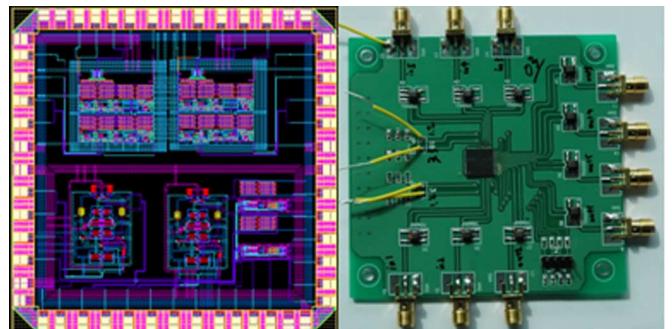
Physical layout and printed circuit board of the implemented filter.
